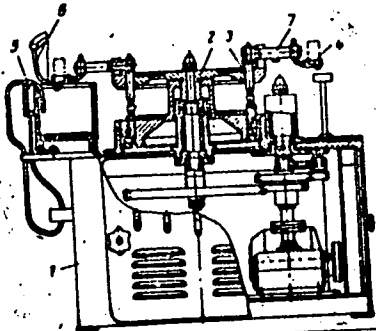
Machine for manufacturing electrodes for chemical power sources
